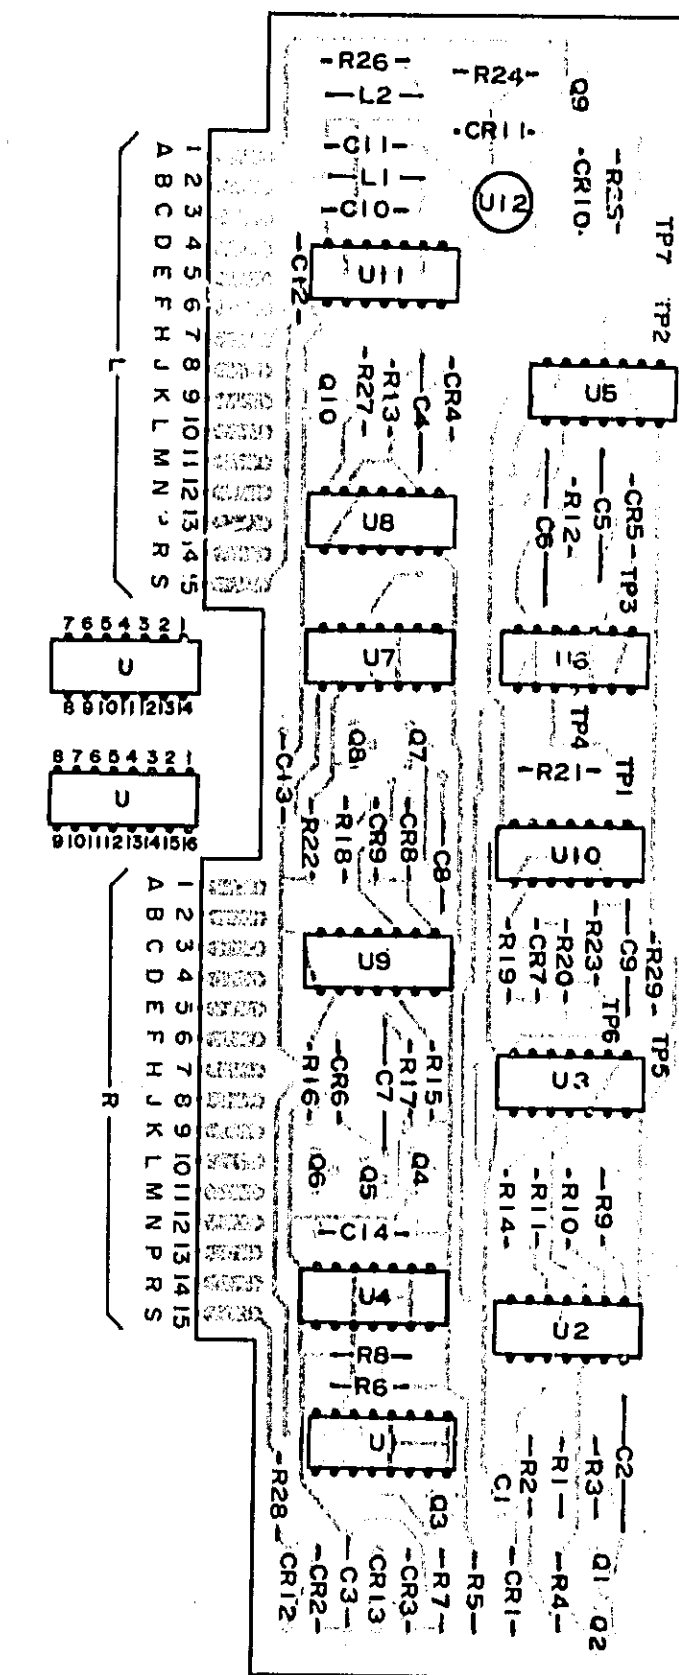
A13 Reset &amp; Clock Pulse Generator Board Assembly Component Locations.
